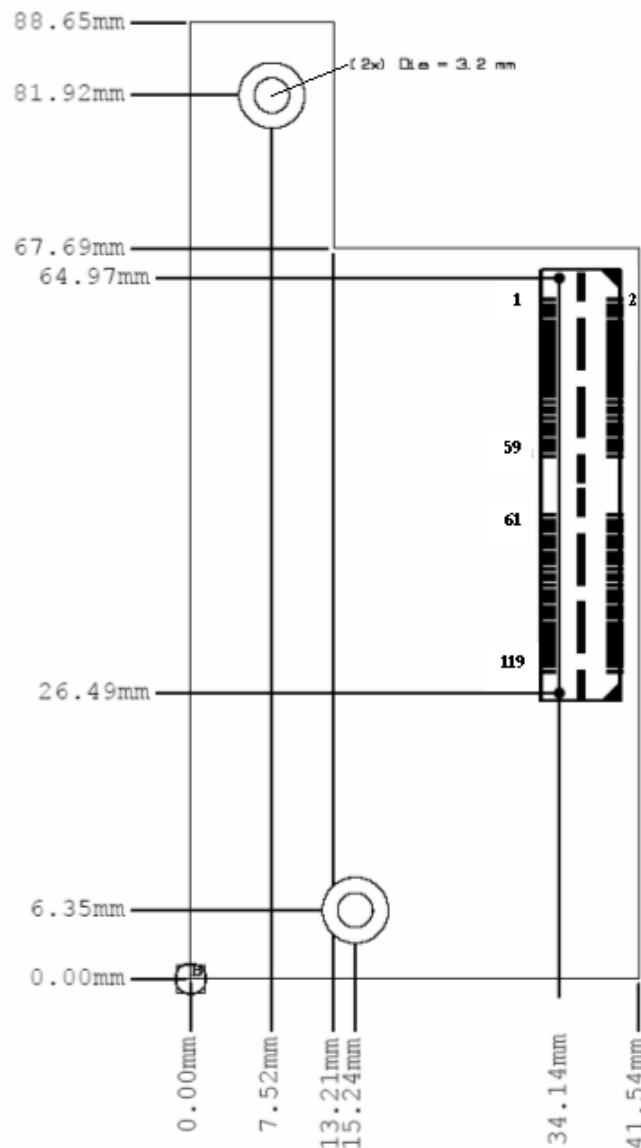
PSDB_PHY2TM Mechanical Dimensions (bottom view).
